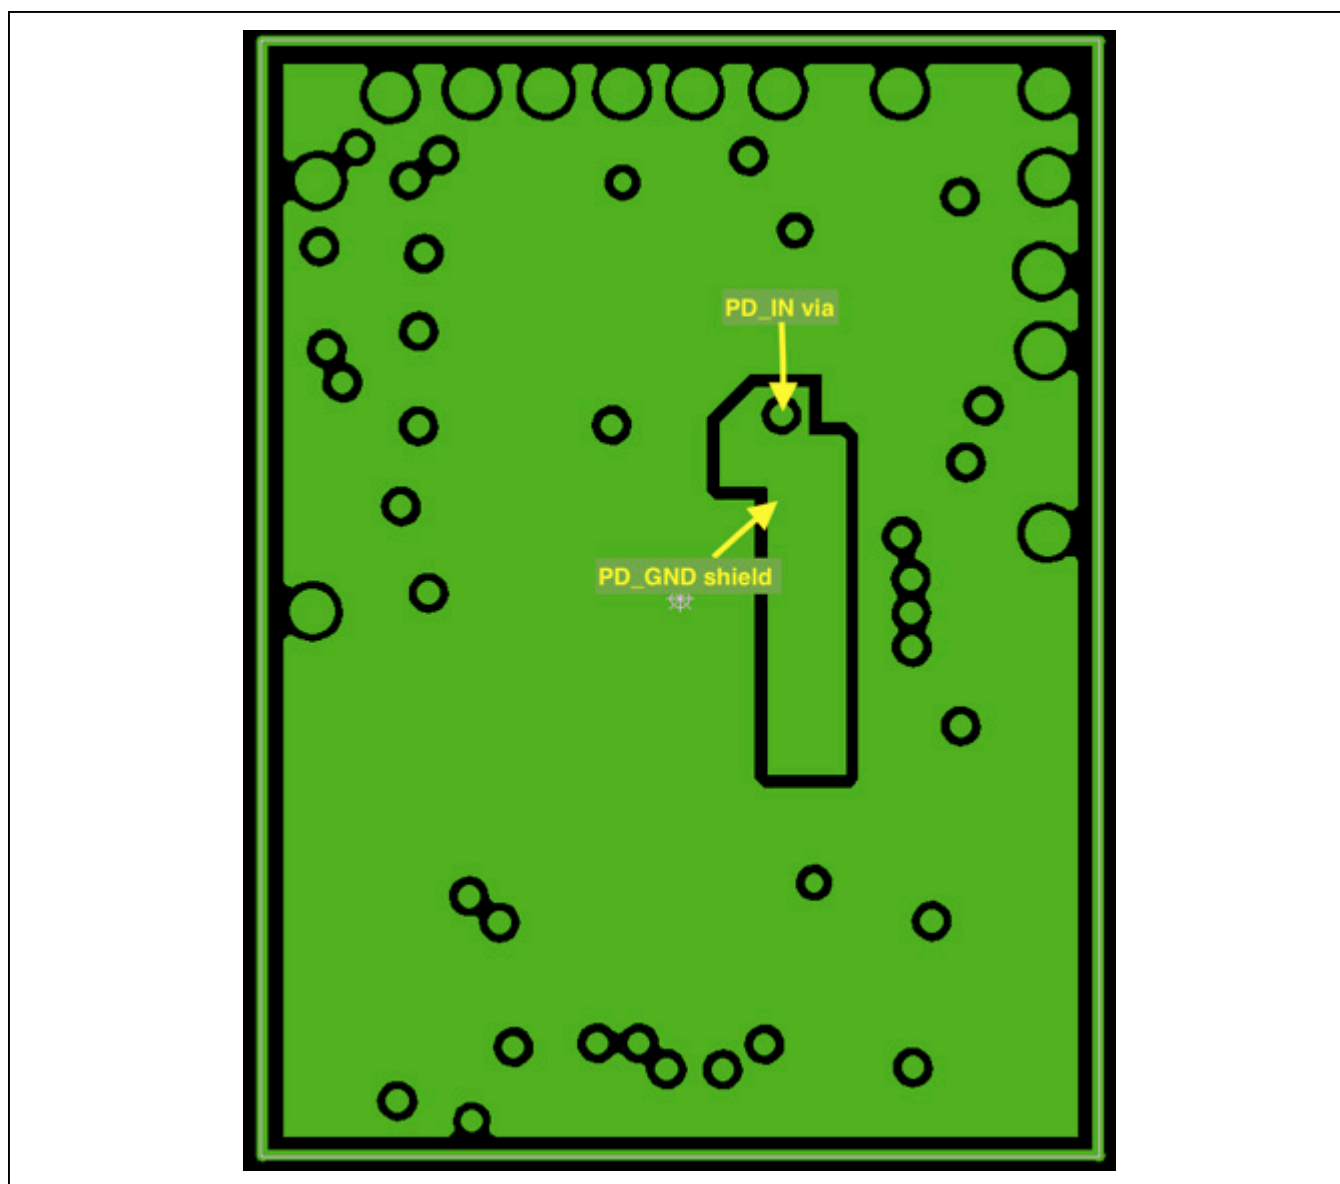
Example PCB Layout, Layer5 (Ground Layer)
